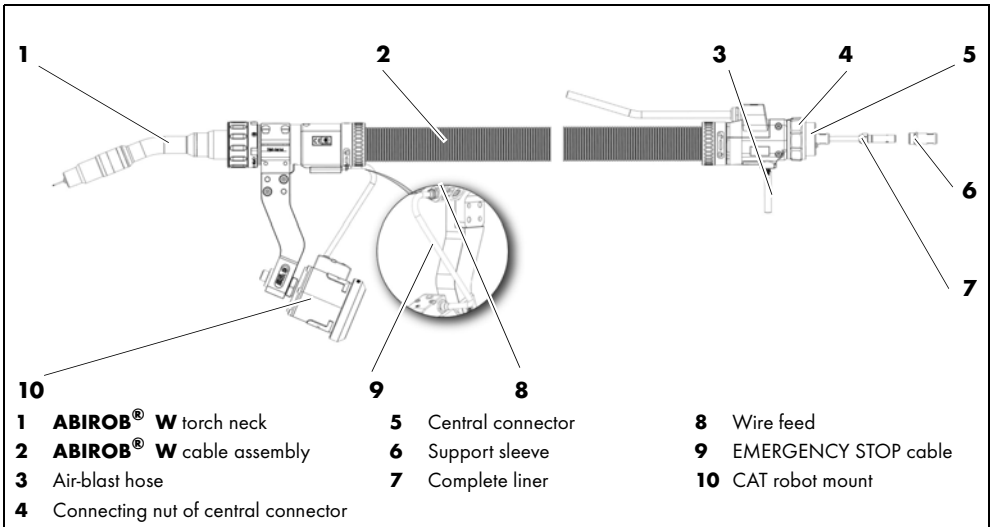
Mounting the ABIROB® W300, W500 torch neck
